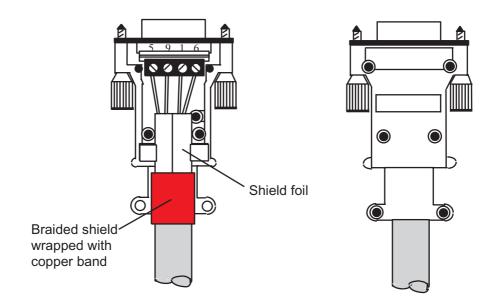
9-pin D-sub male connector fitted to the standard cable
